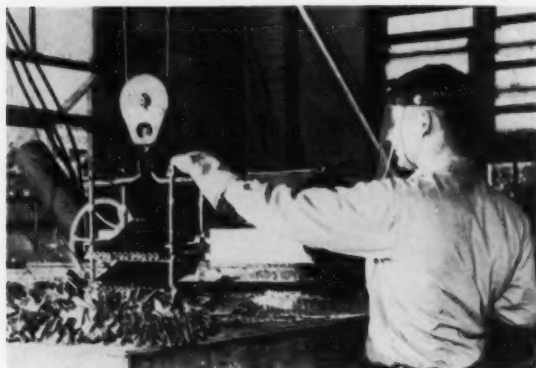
Installation showing combination carburizing brazing of clamping pliers. Work shown on left of furnace is carburized only.
